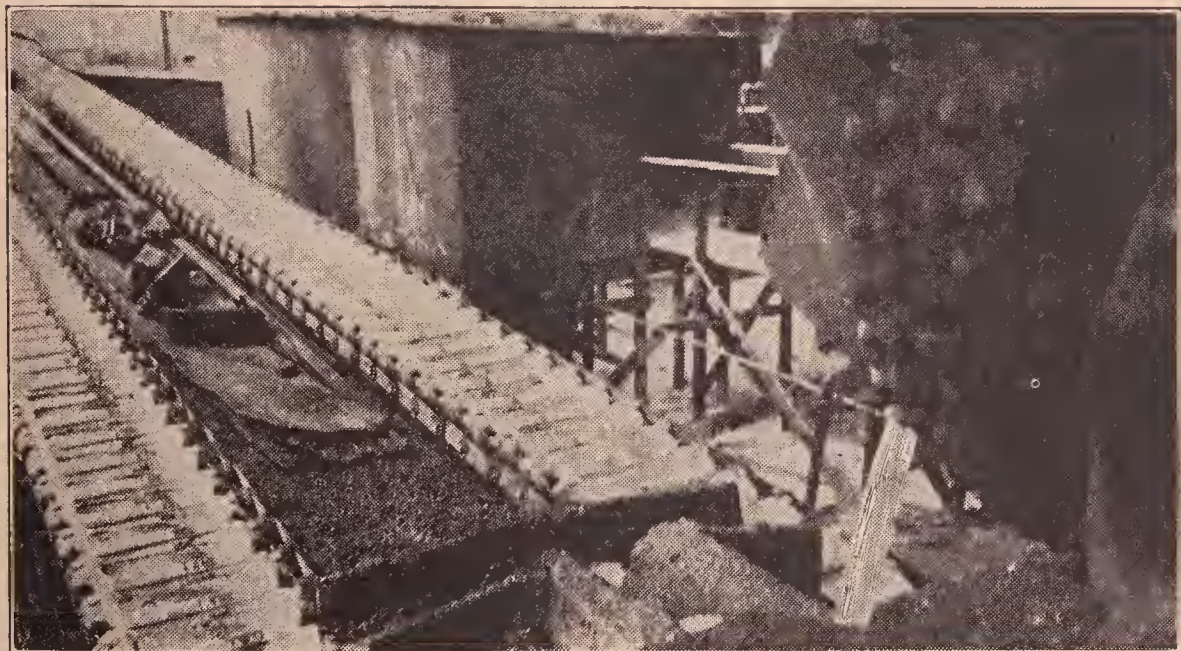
Cast iron flowing from a ladle into one end of a long casting machine.
